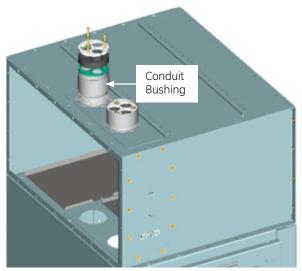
Assembly of conduit bushing on to the plenum top cover for top cable entry.
